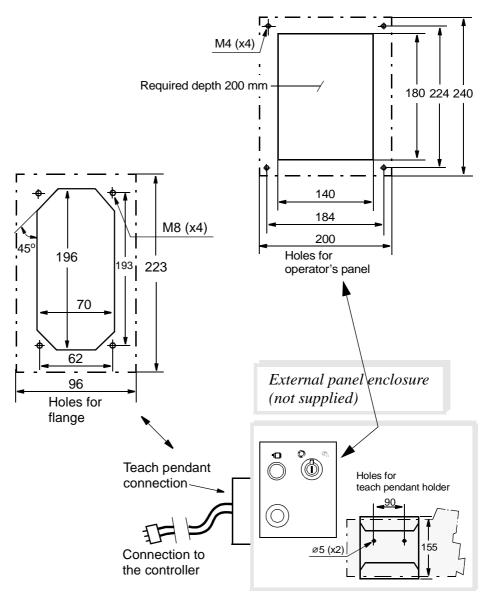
Required preparation of external panel enclosure (all dimensions in mm).
